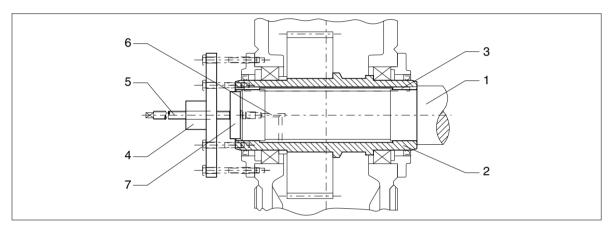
Hollow shaft with parallel keyway, demounting with hydraulic lifting equipment ("Lukas")
